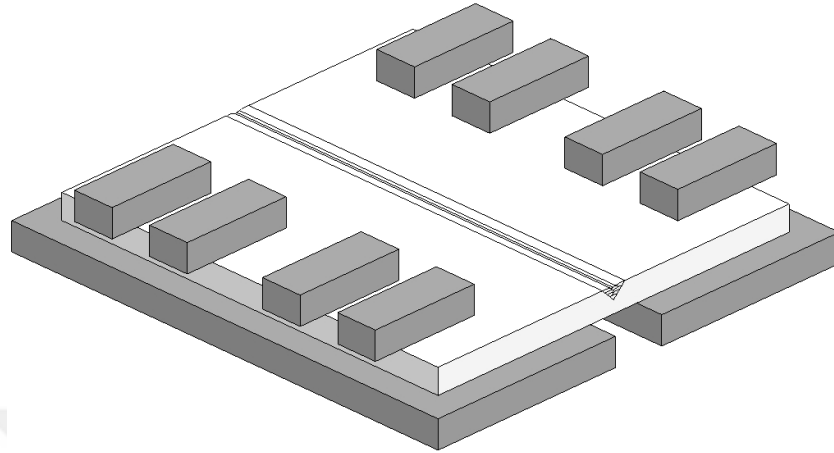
Clamping conditions for 300 mm plate (welding on V-groove)
